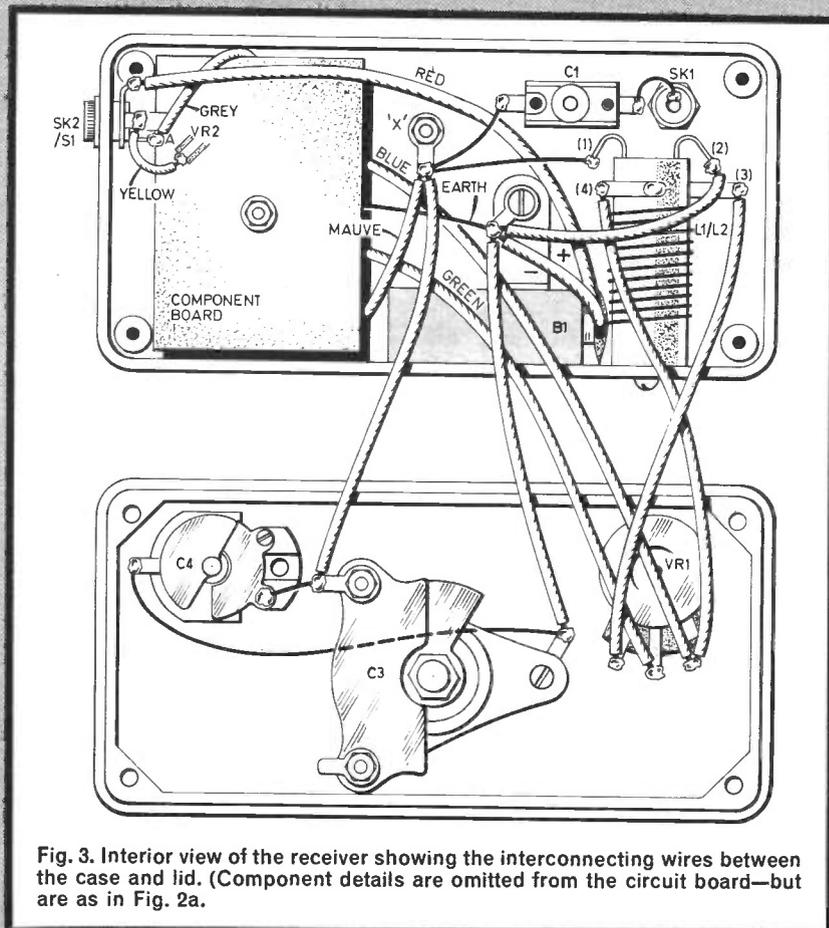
Interior view of the receiver showing the interconnecting wires between the case and lid. (Component details are omitted from the circuit board—but are as in Fig. 2a.)
